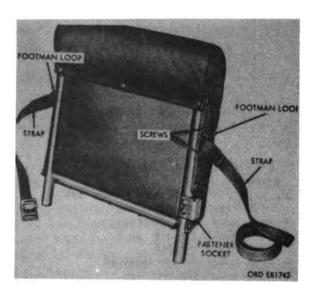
Disassembling or assembling scatback (1 of 8).
